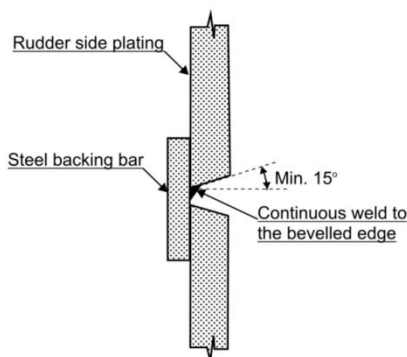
Use of steel backing bar in way of full penetration welding of rudder side plating
